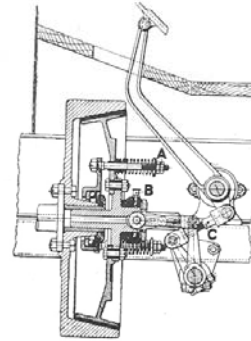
Arrangement of Cone Clutch and Withdrawal Mechanism.
